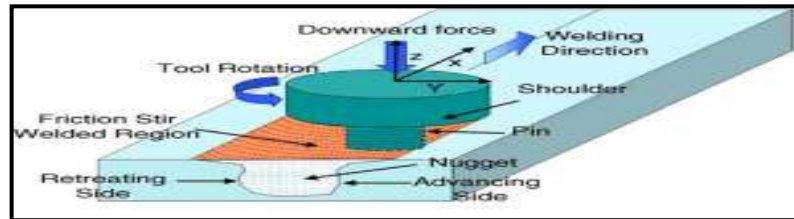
Schematic drawings of friction stir welding [3].
